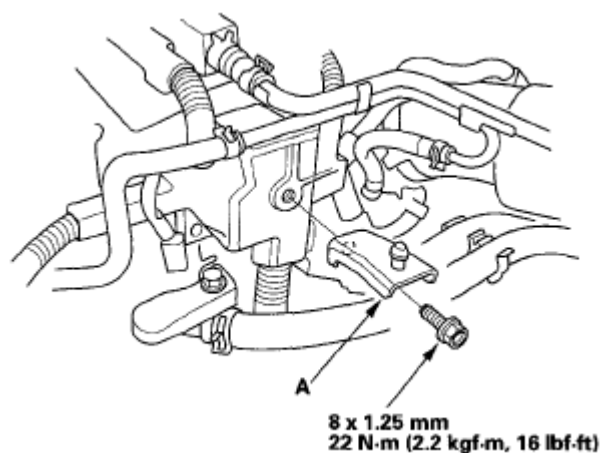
Identifying Air Cleaner Housing Mounting Bracket And Bolt (With Torque Specifications)
